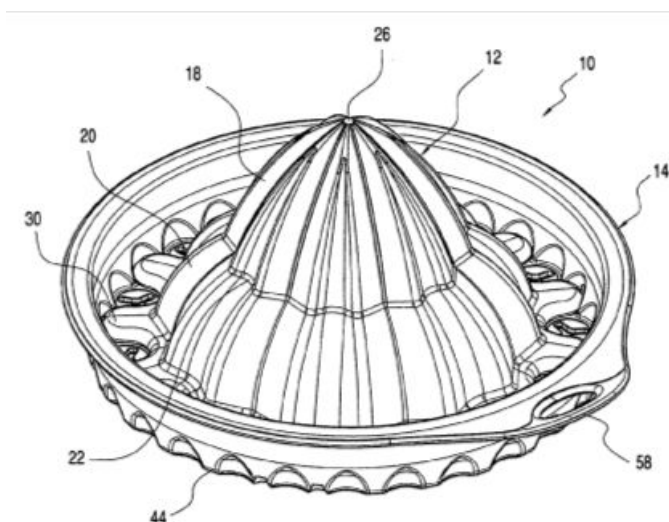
Juicer Assembly (“Juicer and Grater Assembly”)
